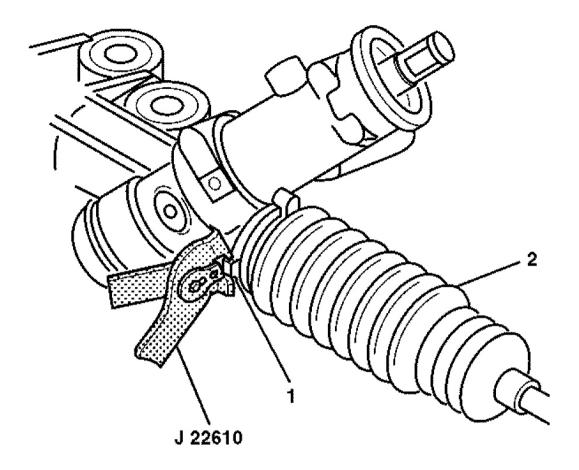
Rack And Pinion Boot, Boot Clamp & J 22610 Courtesy of GENERAL MOTORS CORP.
